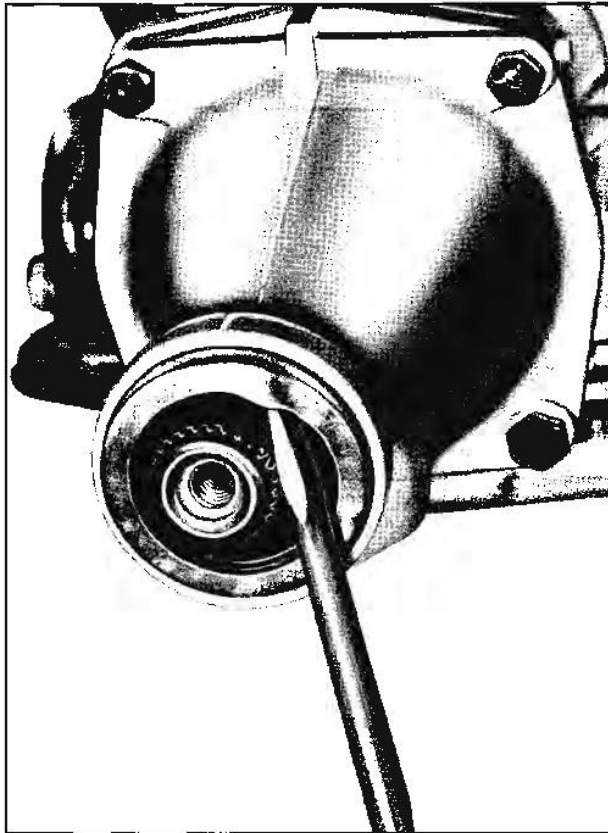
B-30 Removing Rear Bearing Retainer Oil Seal
